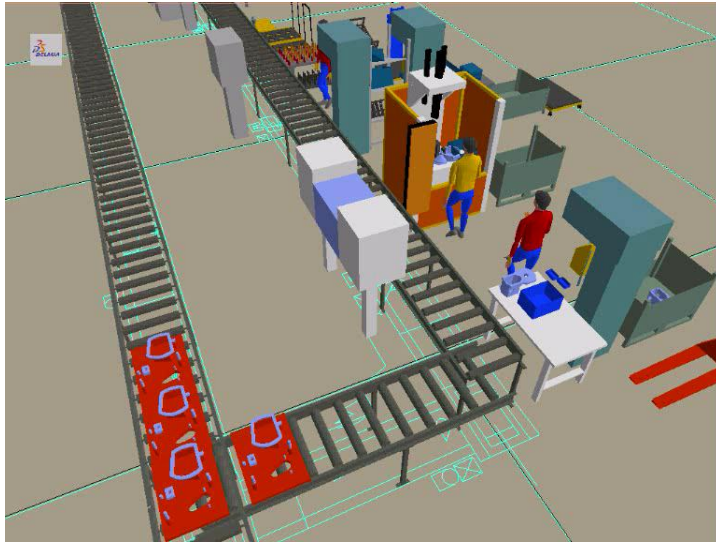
3D Simulation Model of Gearbox Assembly Line [9]
